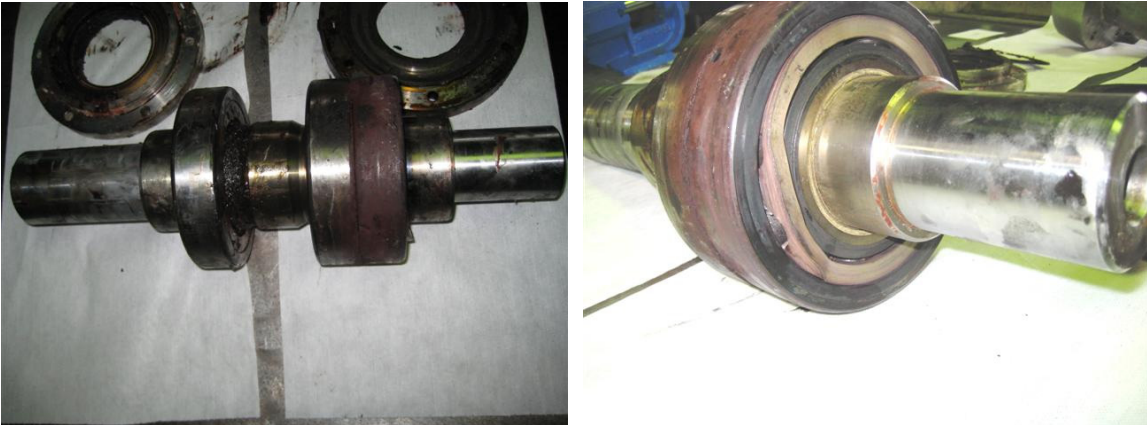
Photos of bearing/shaft assembly that was removed in 2/2010.
